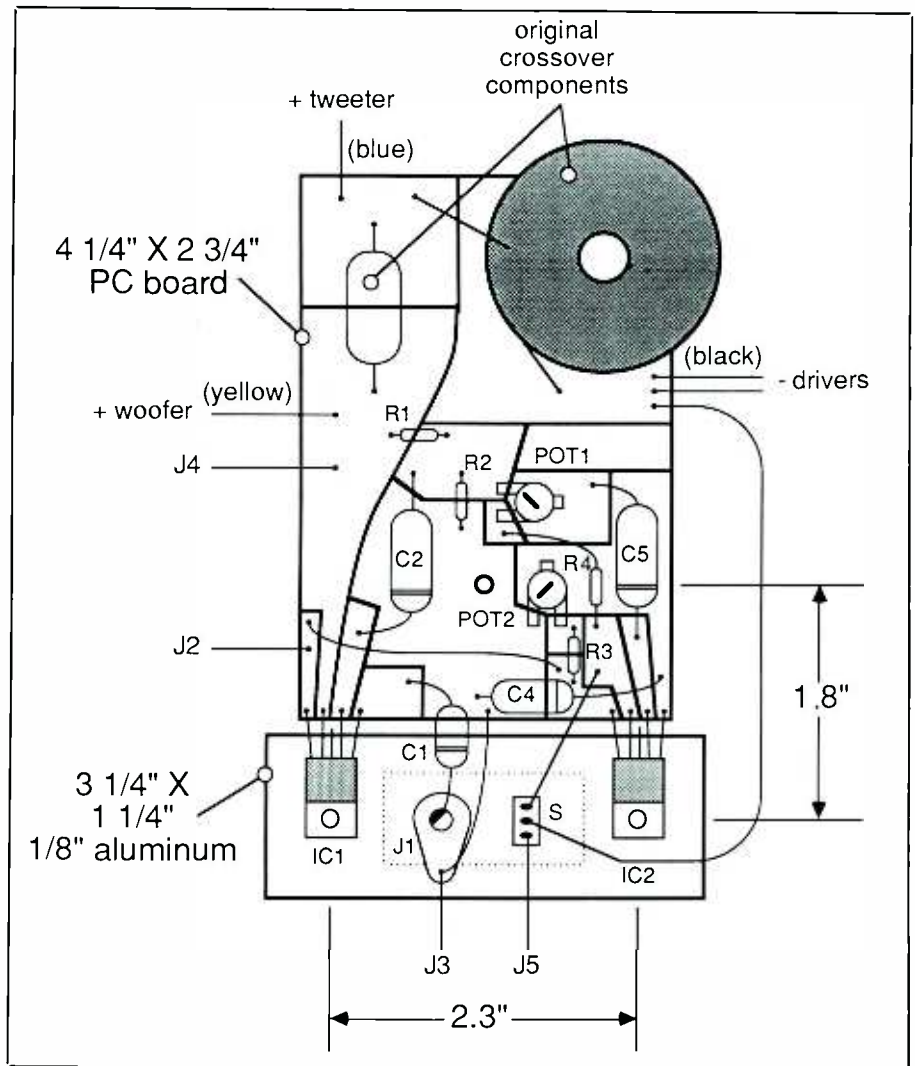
Wiring guide for pc board. All components mount on foil side of board.
